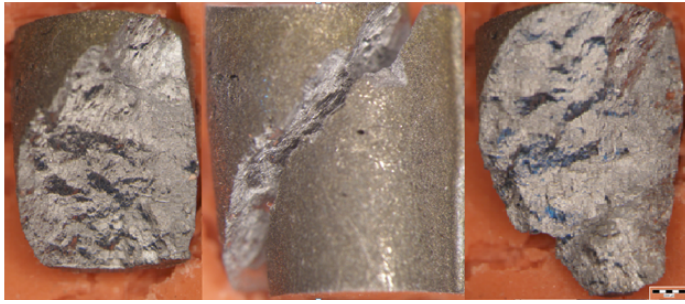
Macroscopic aspect of fracture for a sample after hot work in aggressive test
